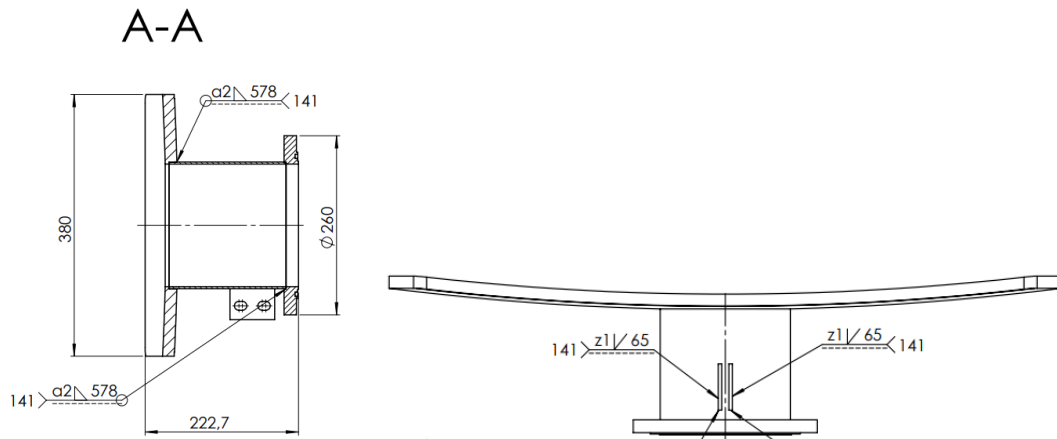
Views of drawing with welds (attachment 13)
